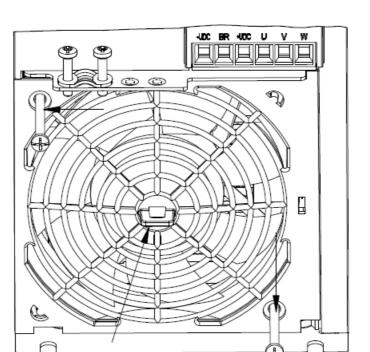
Removing Fan Screws on Enclosure Size K5
